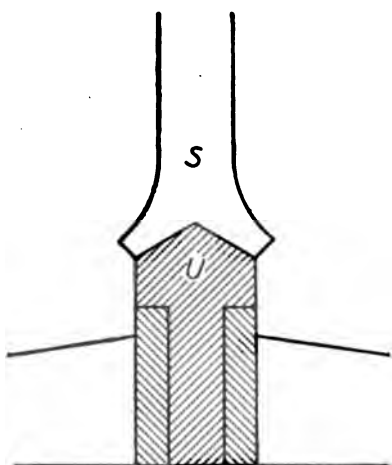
Vertical Section of Lower Part of a Risdon Wheel-Shaft and Wooden Step-Bearing.
